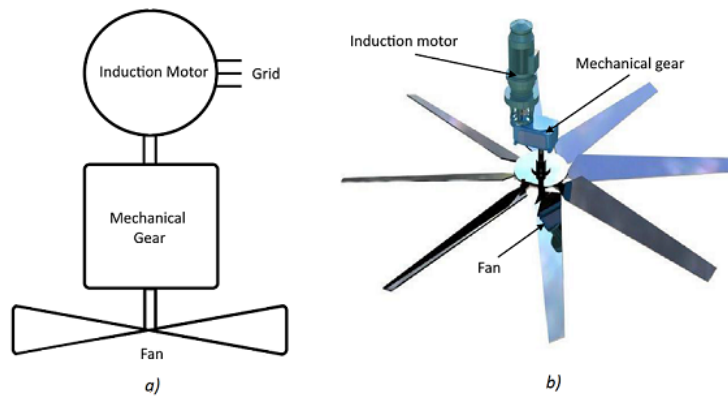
(a) ACC moving parts assembly diagram (b) CAD drawing of moving parts in an ACC [14]
